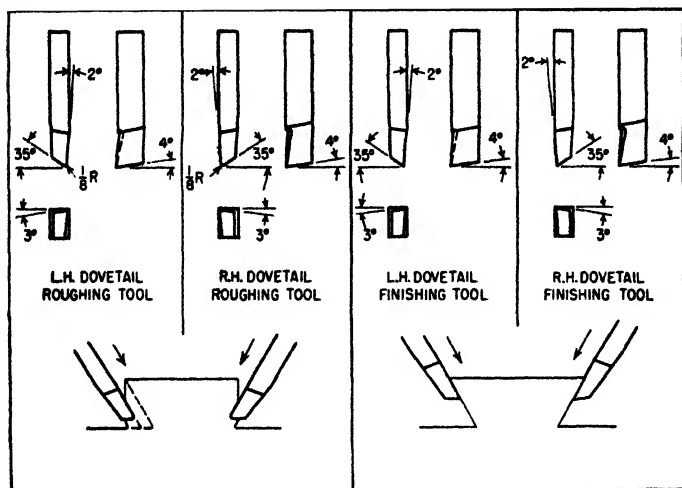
Shaper tools for cutting cast iron. (The Cincinnati Shaper Company)
